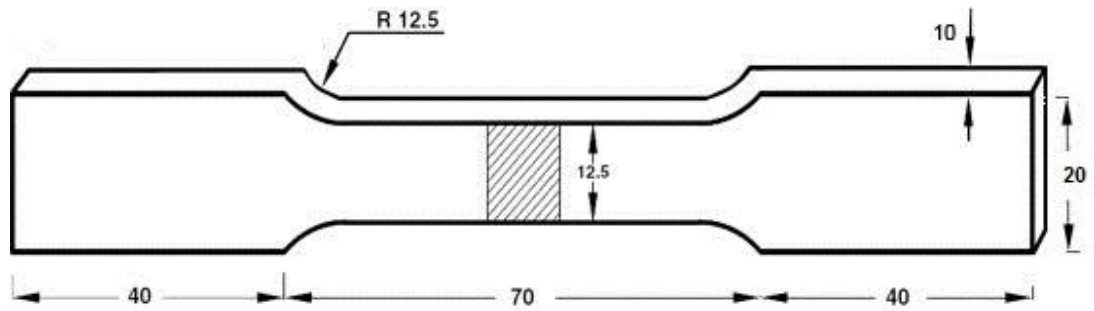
shows the diagram of the dogbone shape from the workpiece to be cut by the EDM Wire-Cut Machine.
